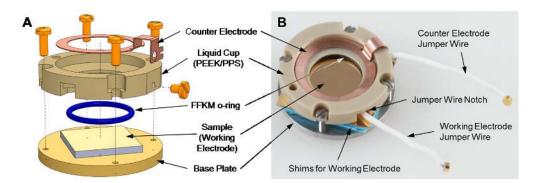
EC Cell Liquid Cup Subassembly. (A) Exploded schematic of the liquid cup. (B) Photograph of the assembled Liquid Cup including sample shims and WE and CE jumper wires. For scale, O-ring inner diameter is 8.4 mm, and base plate diameter is 18.5 mm. Notice the blue platic shims in use, as well as the notch that is provided in the liquid cup to aid in physically clamping a jumper wire to the sample surface.
